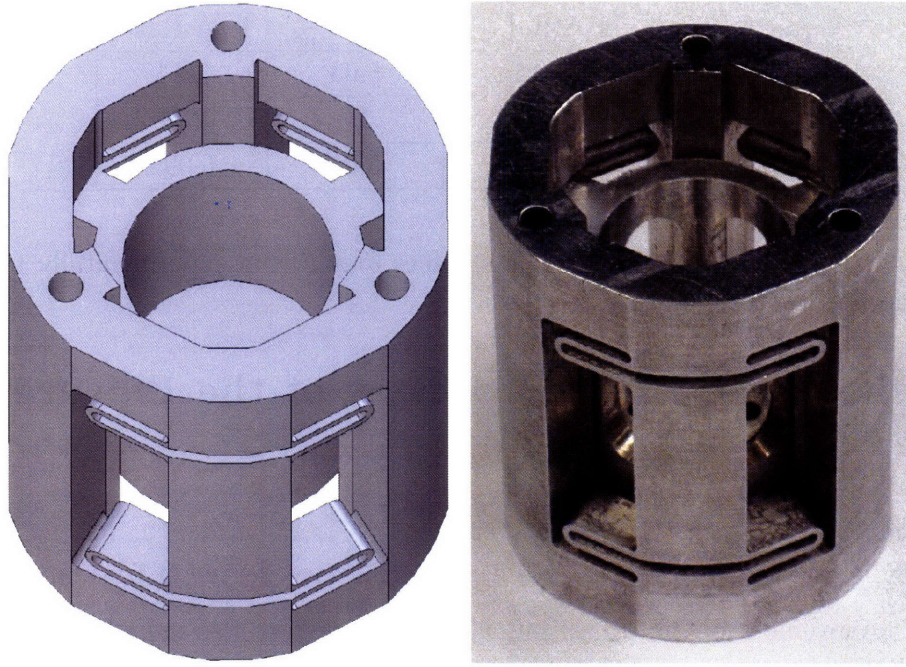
Side by side view of the CAD model and a picture of the machined flexure taken with a digital camera.
